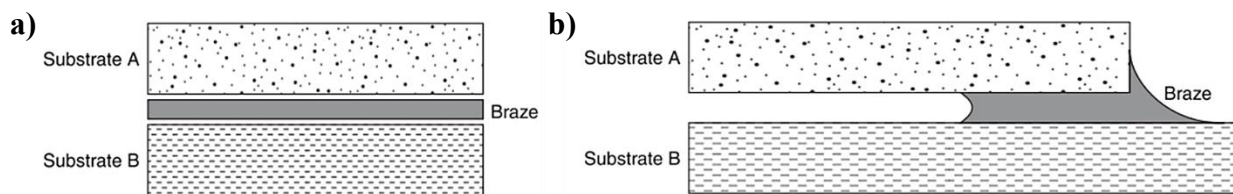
Schematic of Brazing Assemblies (a) Sandwich Assembly; (b) Capillary Action Assembly [13]
